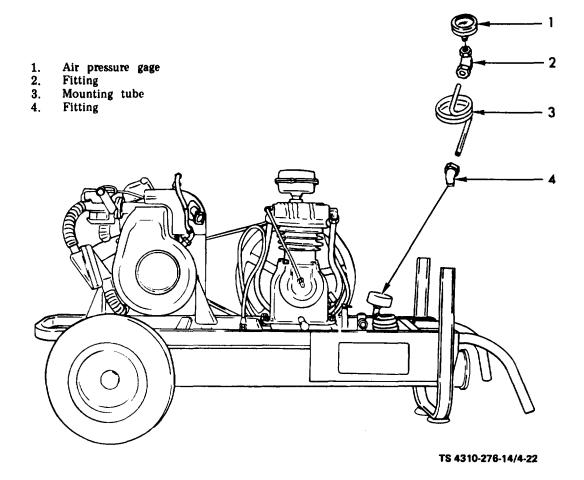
Air pressure gage and mounting tube, removal and installation.
